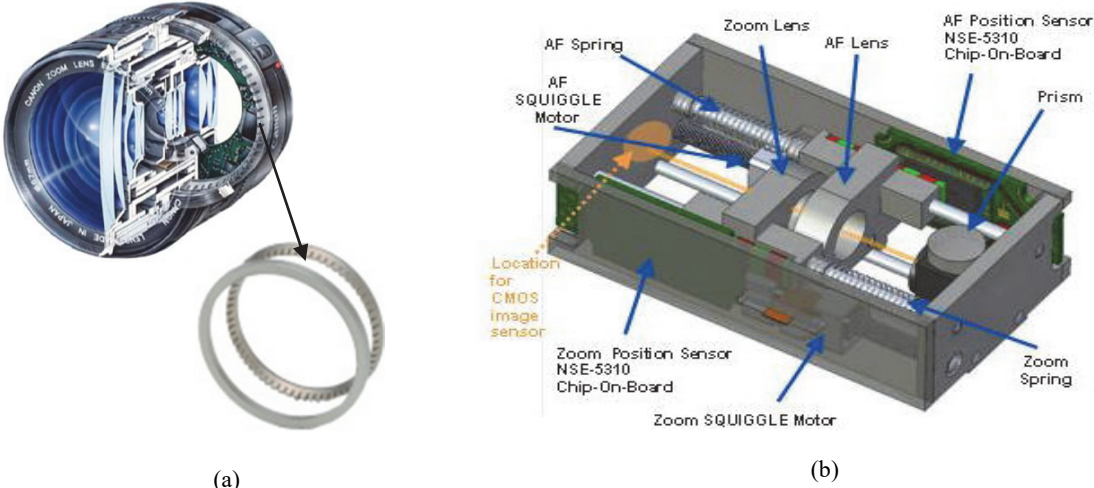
(a) Ring-type USM used in camera [56], (b) Optical zoom module using squiggle motor [46]
